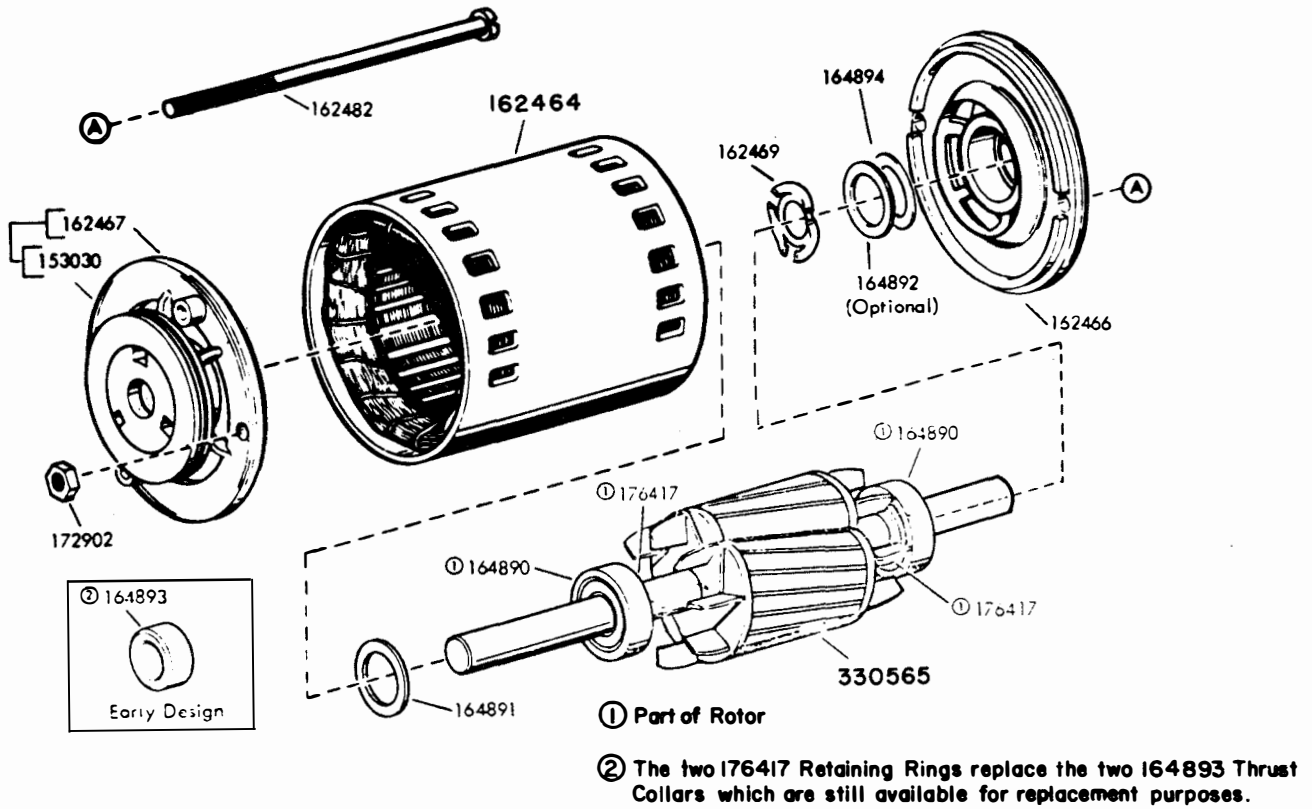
Synchronous Motor Assembly 310295 (Miniaturized) - Used on LMU24 and LMU56
